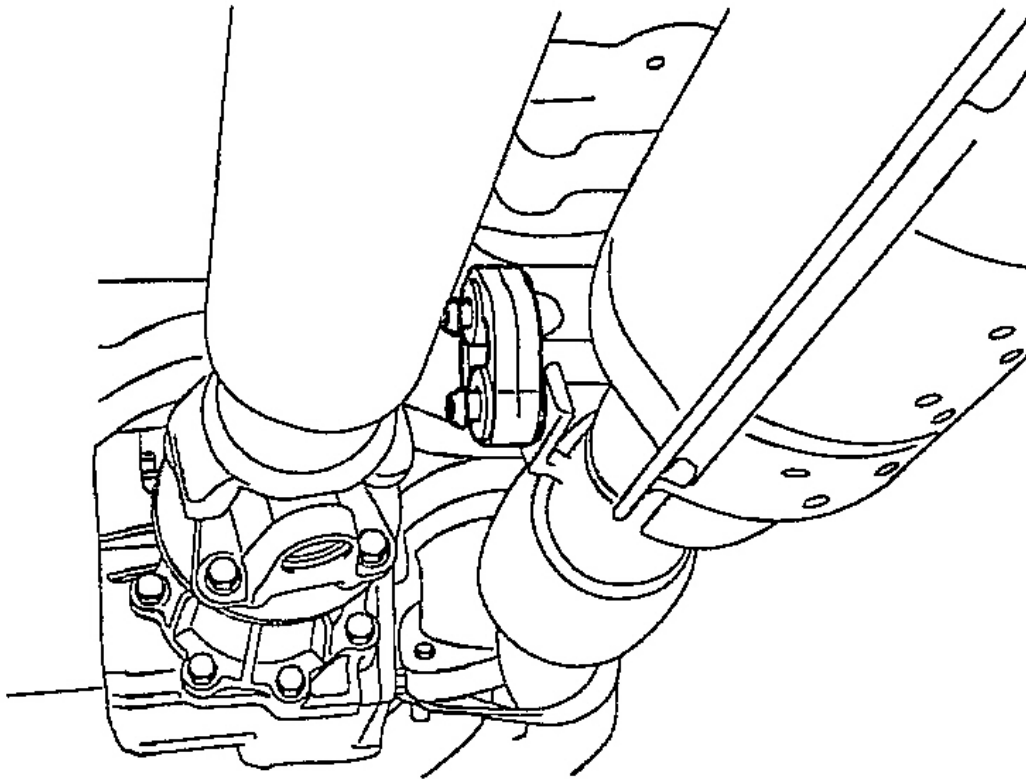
Identifying Front Muffler Bolts (2 Of 2)
